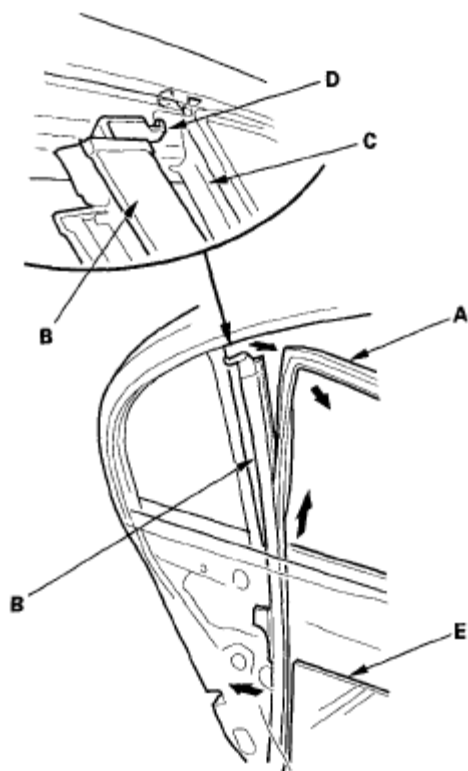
Removing Rear Lower Channel Bolt (With Specifications)
